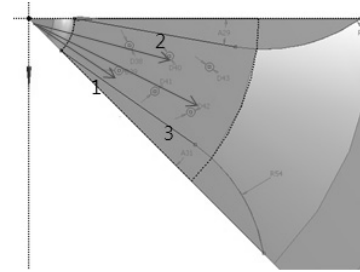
Top view of the through hole array inside the air pressure pick-up head
